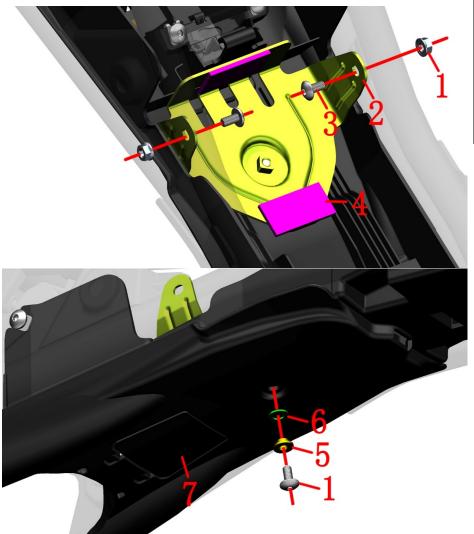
REAR COVER		Electrical device box component 1	CHK	(0)
